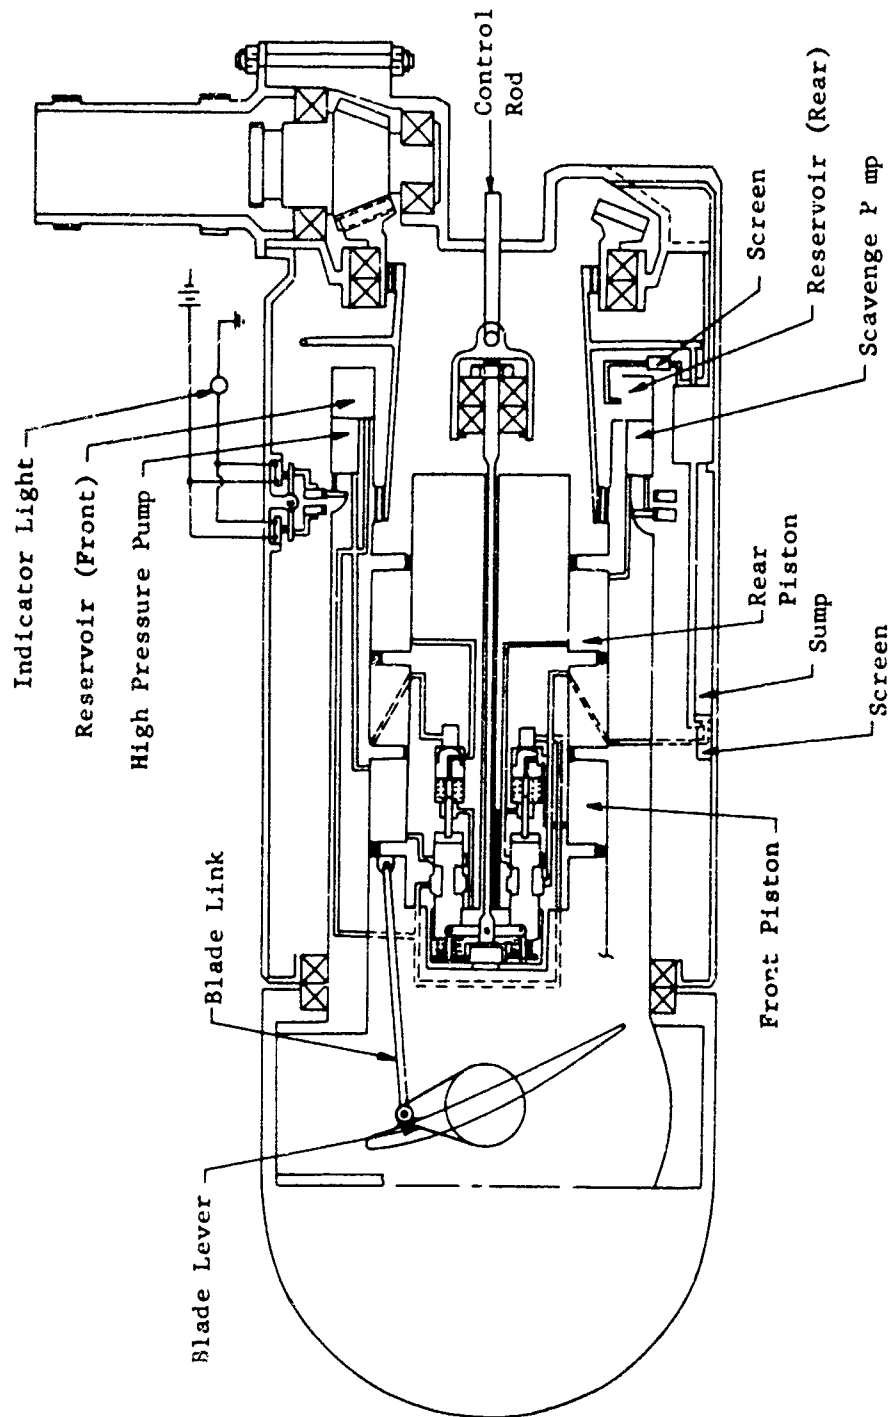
X-19 schematic assembly of the blade pitch change mechanism.
